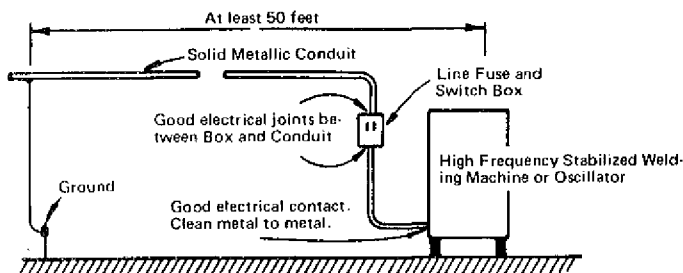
Power Service Installation H.F. Stabilized Arc Welding Machine
